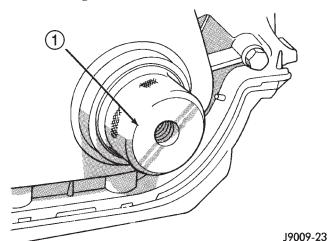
Timing Case Cover Alignment and Seal Installation Tool 6139
